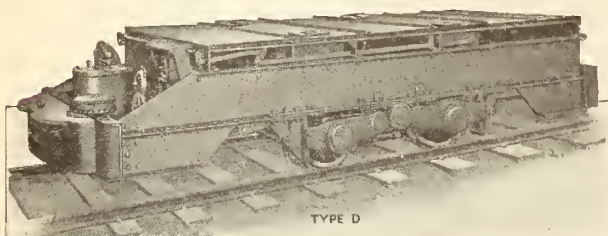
Low-type machine, equipped with radial housings and chain adjustment to compensate for wear.
